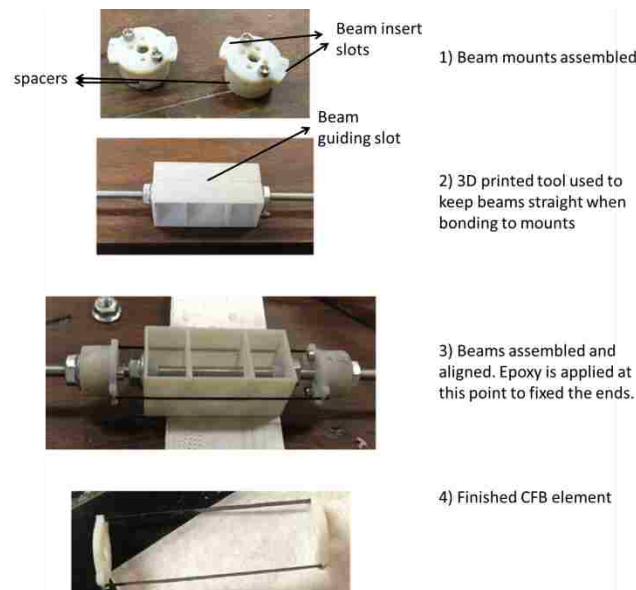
CFB element assembly parts (1-4). The beam mounts are attached to round 3D printed spacers by screws (1). A guiding tool used to align the beams is mounted on a threaded rod through concentric threaded holes (2). The spacers with the beam mounts are threaded into the rod and set apart based on the beam length. The beams are inserted and high strength epoxy is used to fix their ends (3). The CFB element is removed after the epoxy has cured overnight (4).
